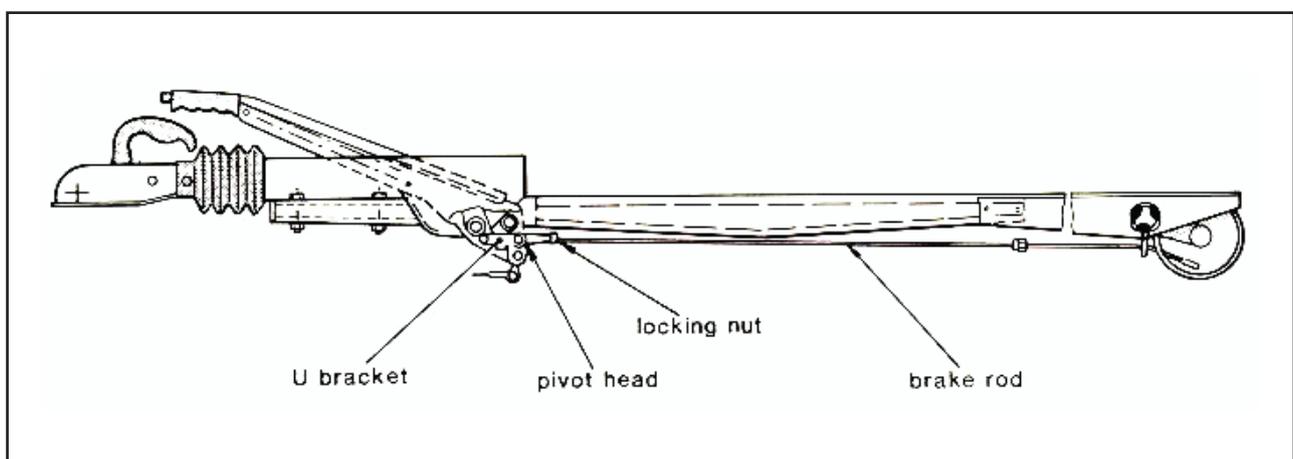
Coupling/Overrun device. Ensure that the draw bar is fully extended. Screw the brake rod into the pivot head and secure with an M10 nut. Using the M10 ball nut, connect the brake rod to the Bowden cable via the compensating bracket. Fit and hand tighten the hex securing nut. Tighten the M10 ball nut on the brake rod until there is no further play on the pivot head against the draw bar (the draw bar must be fully extended).
